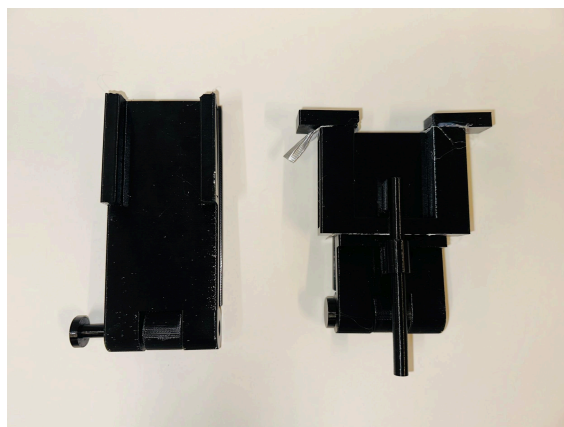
Design v4 (Magnet Alignment Clamping System 2)
